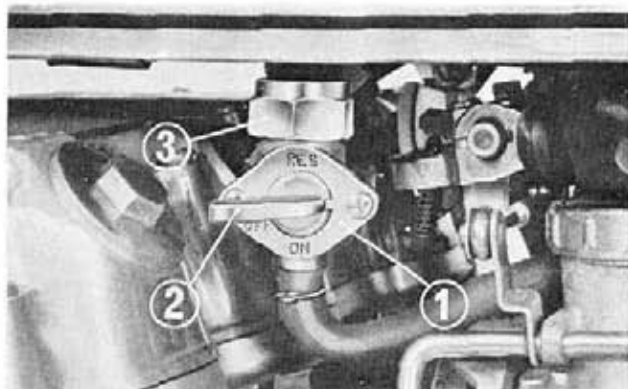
① Fuel cock ② Lever ③ Fuel cock fixing nut
